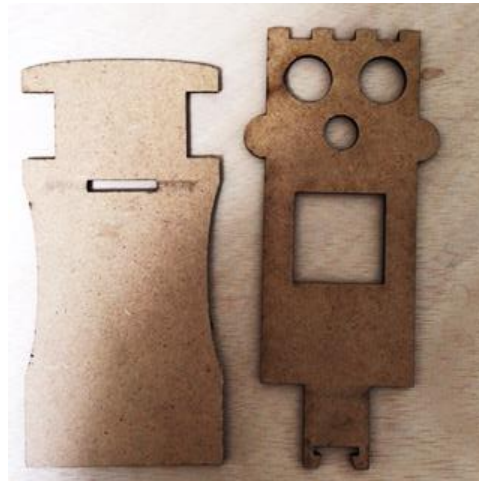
Final Base and face 2 (laser cut without holes & single layer)
